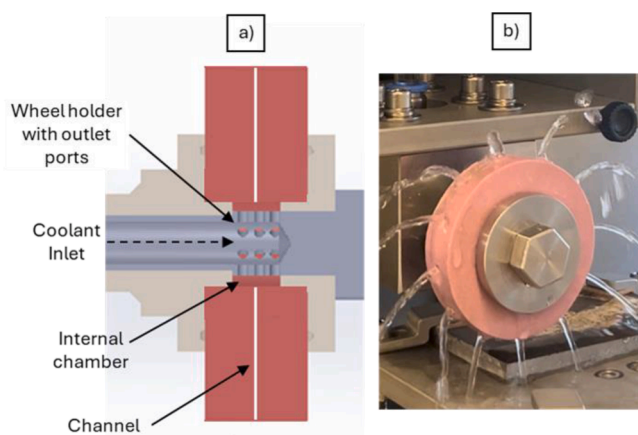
Internal lubrication system: (a) CAD model of the rotating shaft and wheel holder (Schematic only, scale and geometry not represented); (b) photograph of coolant exiting through the radial channels of the grinding wheel (wheel not rotating).
